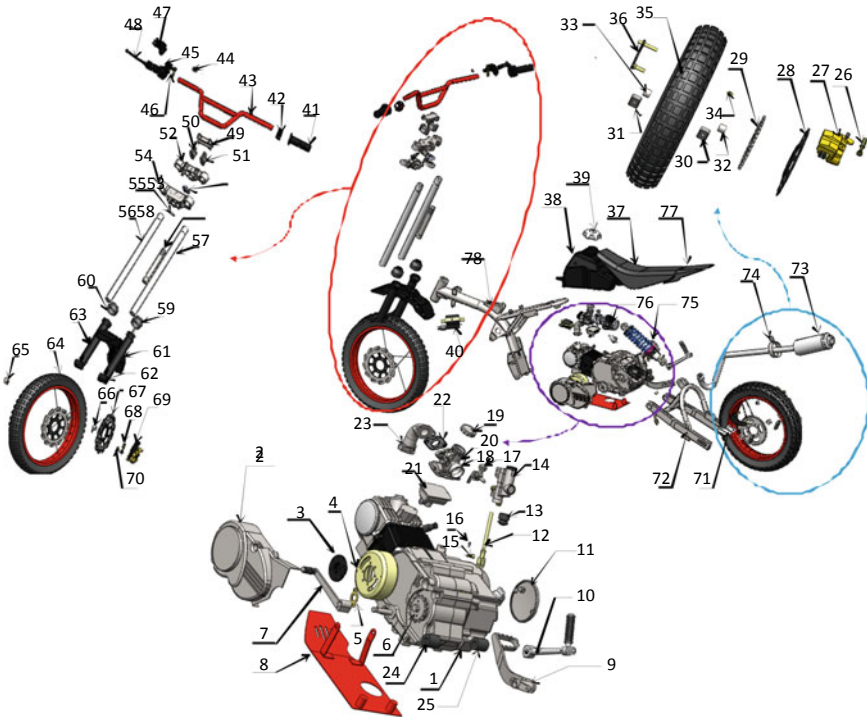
Illustrative mechanism: motorbike-125 CAD model
